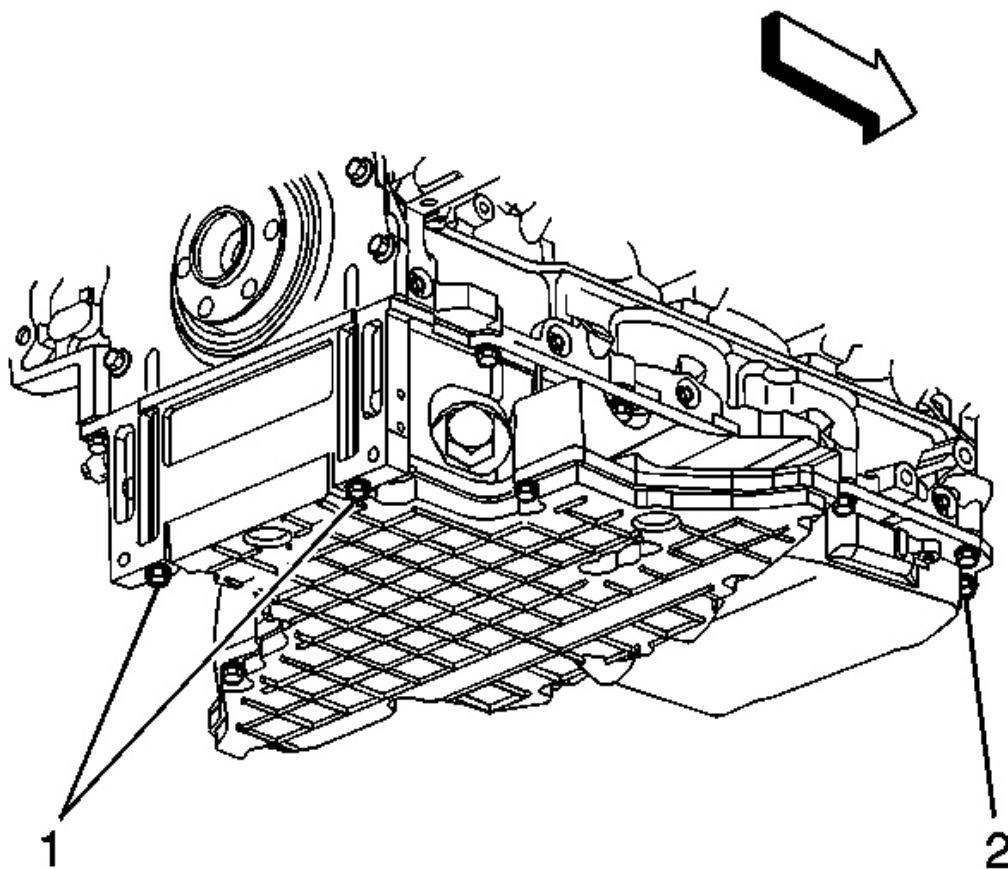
Oil Pan-To-Front Cover Bolts & Oil Pan-To-Rear Cover Bolts
